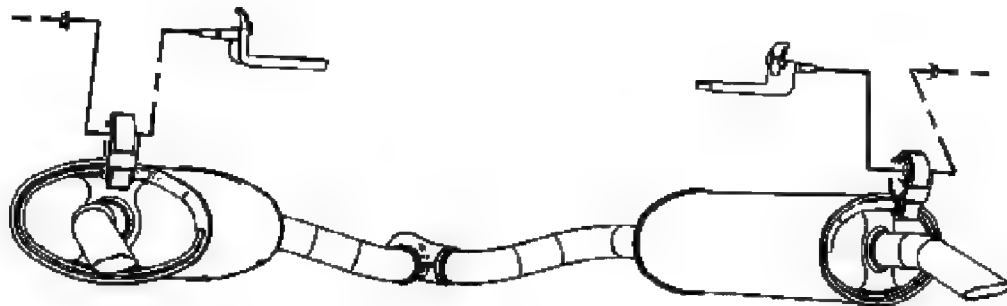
Identifying Rear Exhaust System Hanger Bracket Nuts
